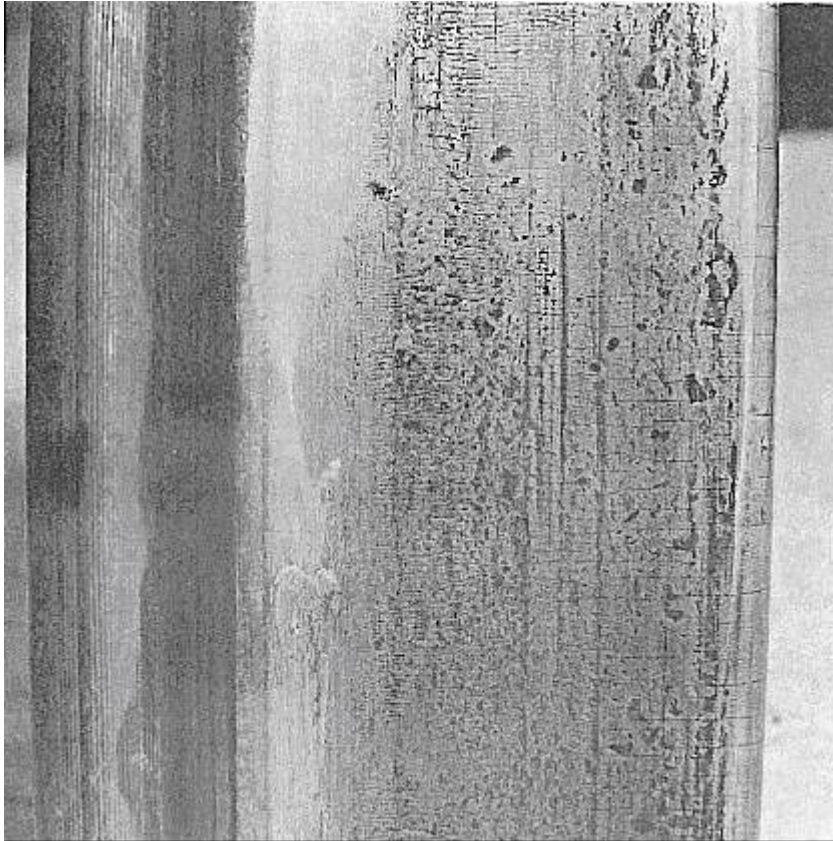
Cracks on wheel tread extending down the chamfer
